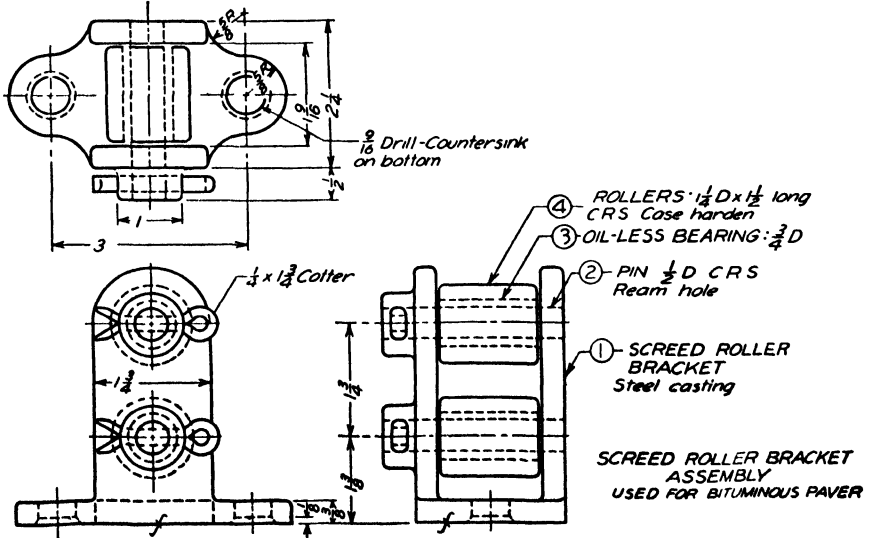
Prob. 302. Make detail drawings of the roller bracket.
